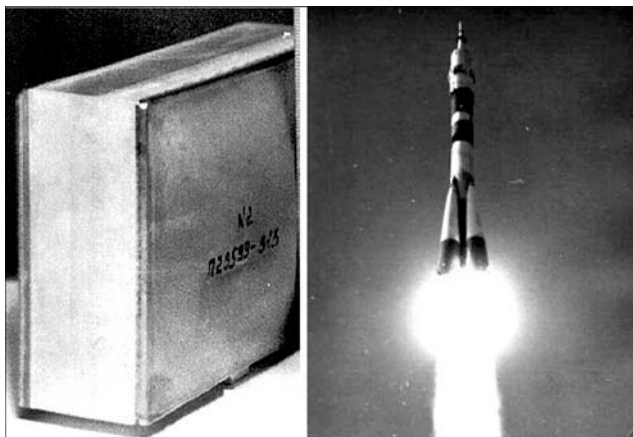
Explosion welded composite titanium-aluminum case of antenna-feeder device of a space system
